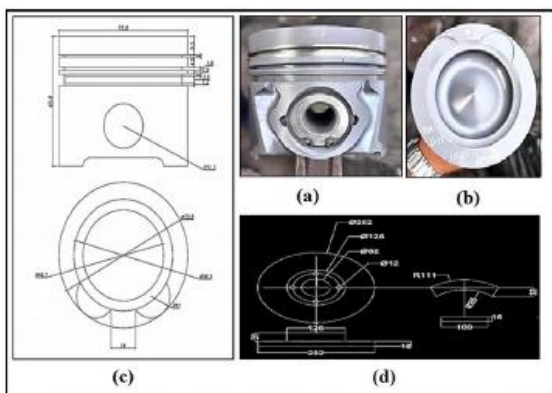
(a) actual photograph of piston head, (b) actual photograph of disc brake rotor, (c) 2D drafting image of the piston head, (d) 2D drafting image of the disc brake rotor
